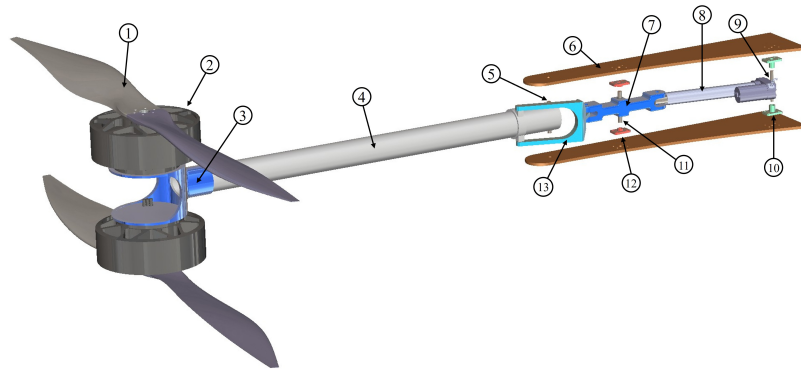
Exploded view of the mechanical components that form the folding mechanism for the propeller support of the flying car that serves as the main case study of the paper. 1: Propeller, 2: Motor, 3: Motor Support, 4: Arm, 5: Arm Pin, 6: Base, 7: Crank, 8: Actuator, 9: Actuator Pin, 10: Actuator Support, 11: Crank Pin, 12: Crank Support, 13: Connecting Rod.
